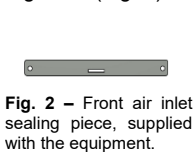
Front air inlet sealing piece, supplied with the equipment.
